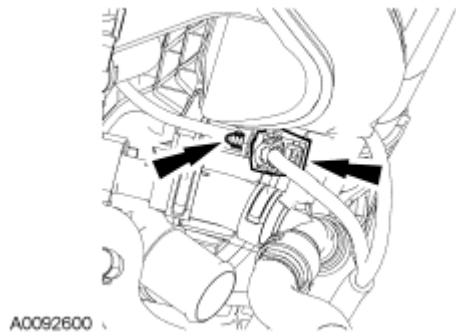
Locating Knock Sensor Electrical Connector And Pin-Type Retainer
